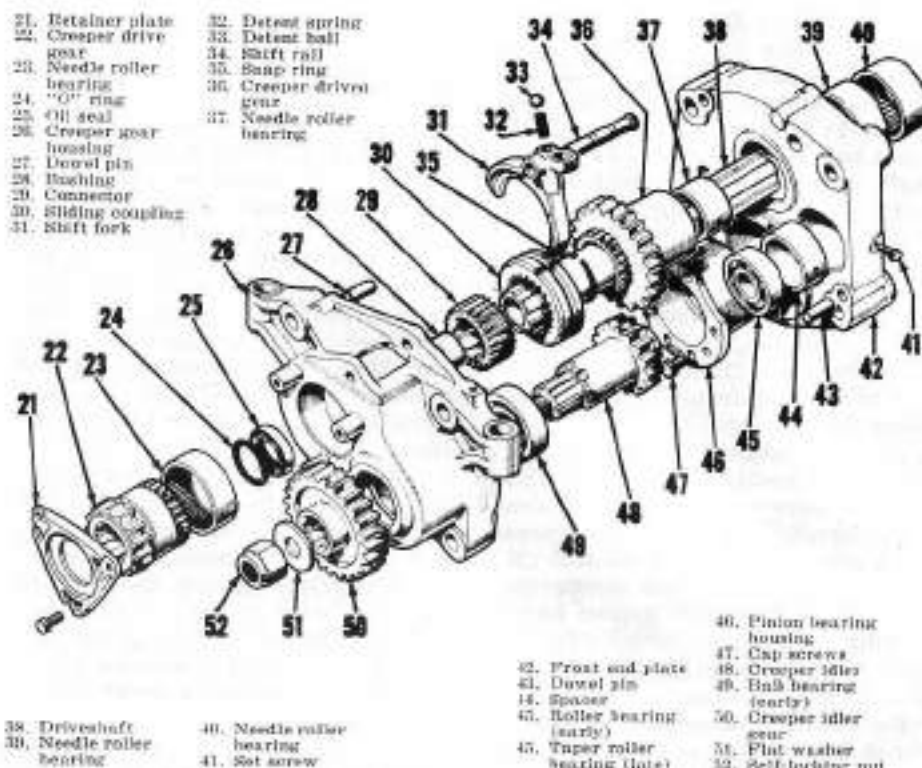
Exploded view of creeper drive unit of 12-speed transmissions for models 780, 880, 990, 3800 and 4600. Front end plate (42) differs from that used on six-speed transmissions; see Fig. 109.
